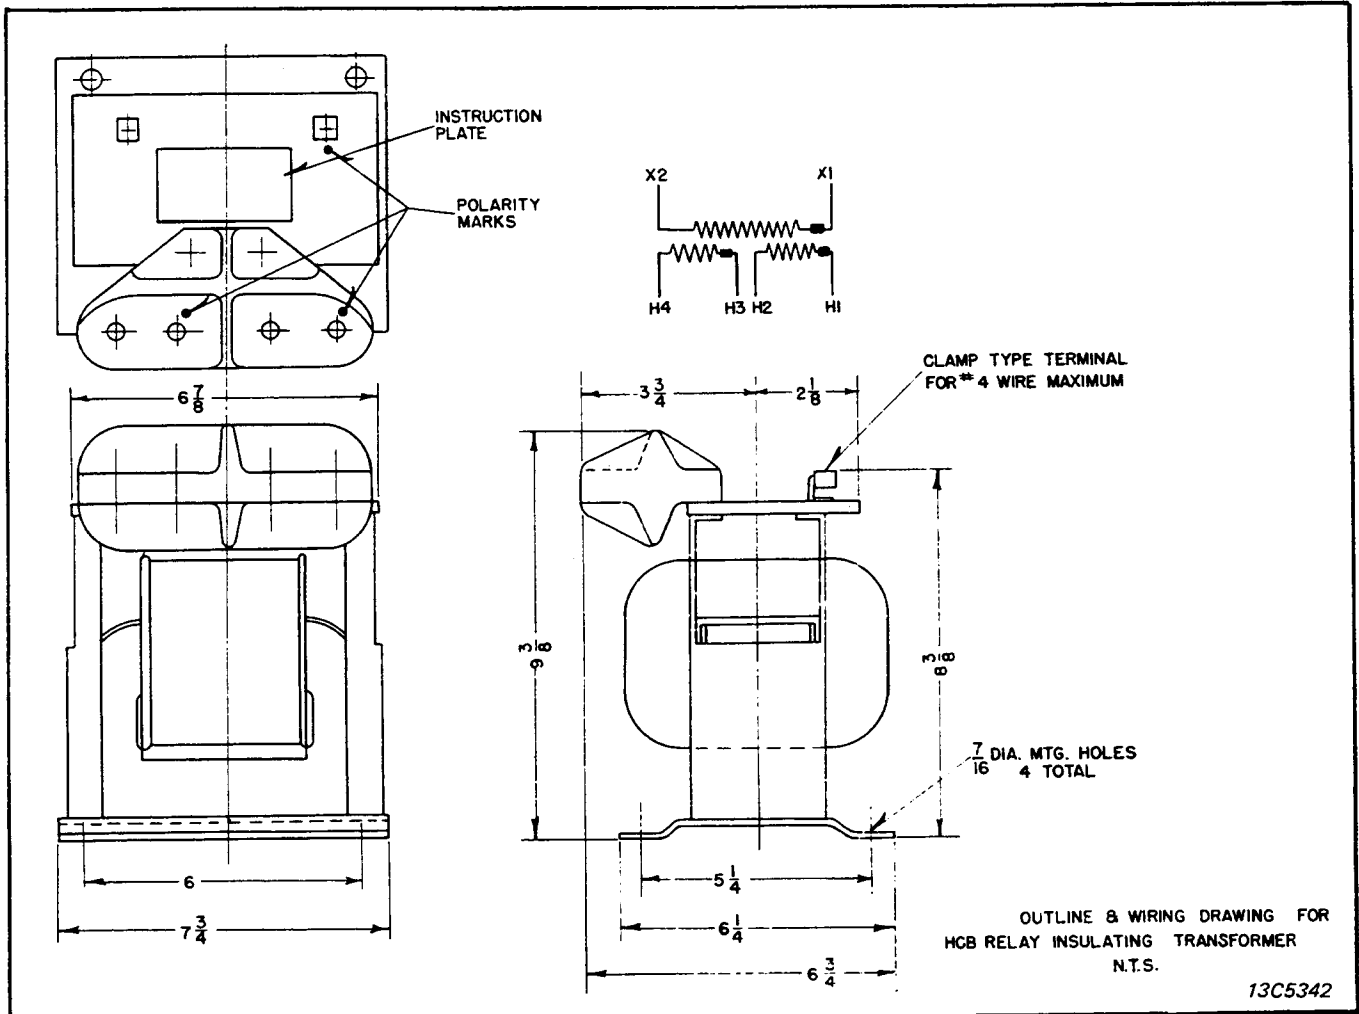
Outline and Drilling Plan of HCB Relay Insulating Transformer.
